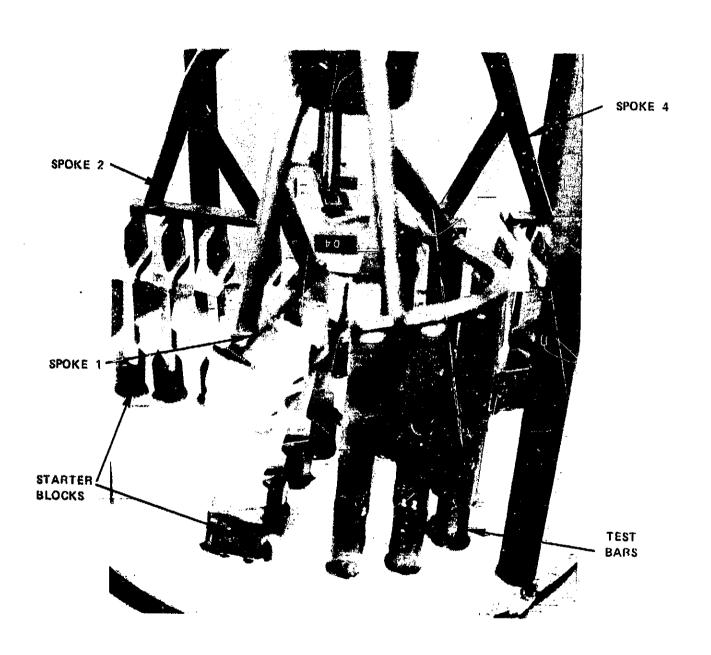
Task I, Mold 13 Wax Assembly for the Preliminary Design of the Uncooled TFE731-3 Blade in the Root-Up Position.
